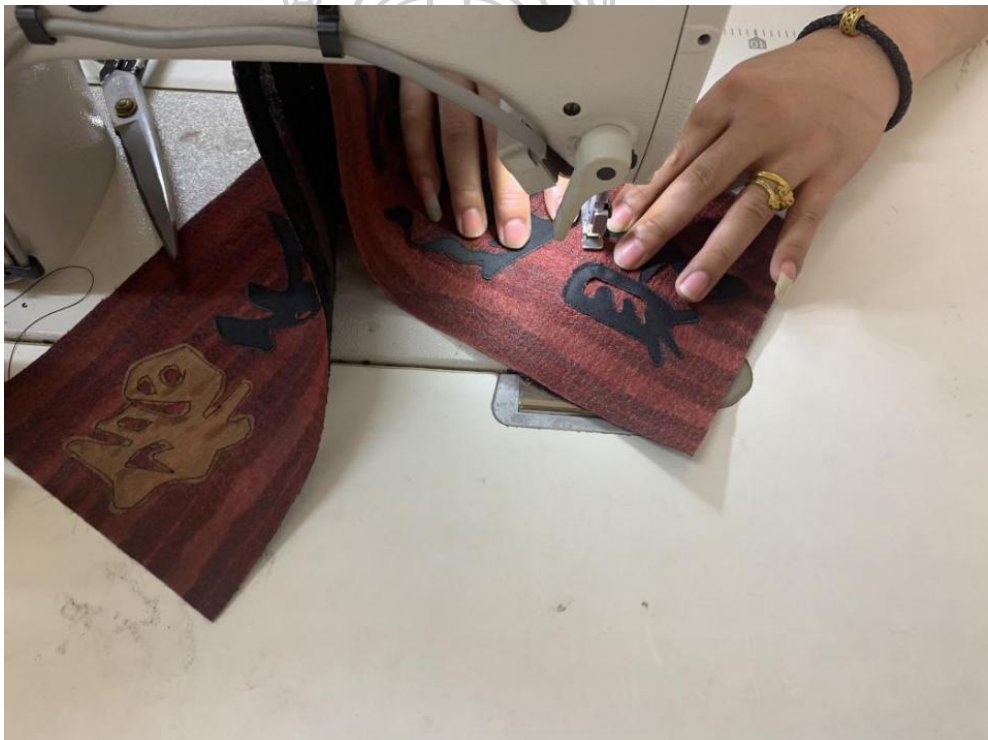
Quilting machines were used to stitch the pieces of fabric together.
